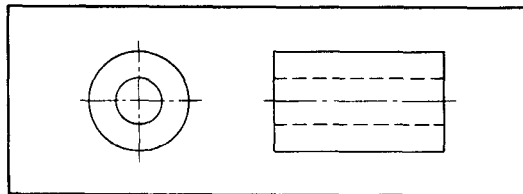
Two-view drawings. Parts such as cylinders require only two views. More would duplicate the two already drawn.
